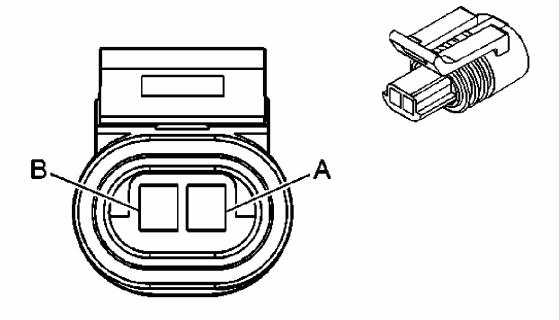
Engine Oil Level Switch Connector End View Courtesy of GENERAL MOTORS CORP.
